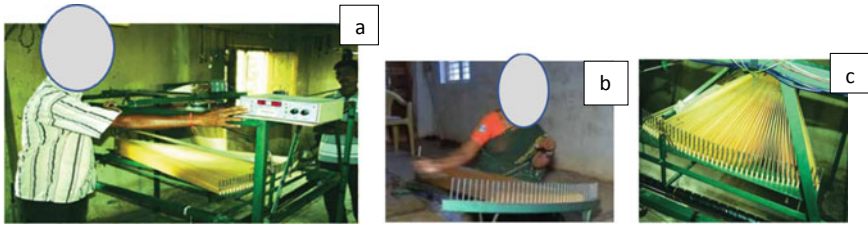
a Mallesham with the Asu Machine, b hand winding, c machine winding procedure of yarn
